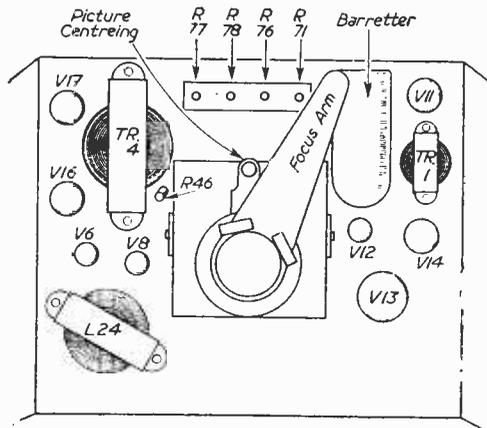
Rear view of main chassis; R.F. unit and tube removed for clarity.
